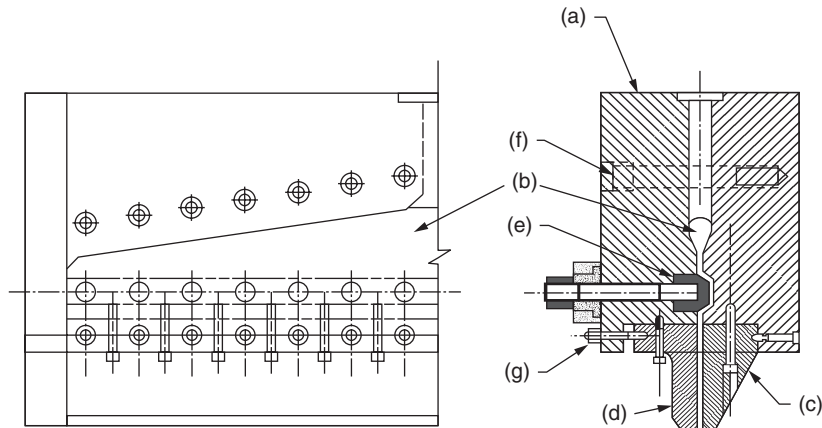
Fish tail die: (a) Die body (b) Adjustable lip (c) Lip clamping screw (d) Lip adjusting screw (e) Clamping screw.
